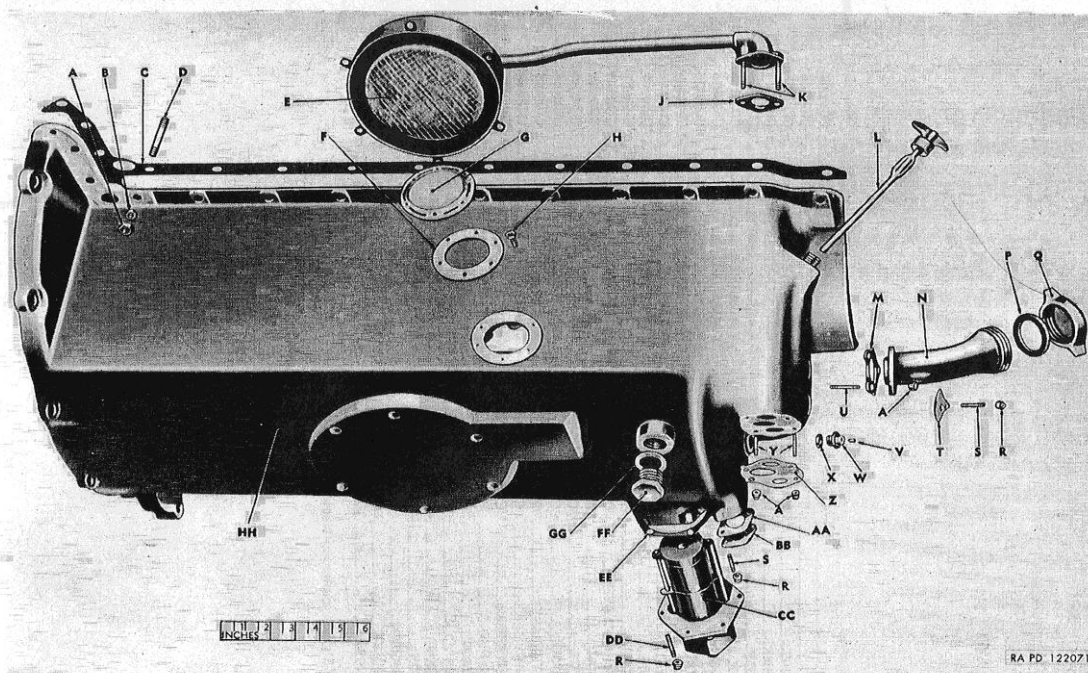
Engine oil pan and related parts, early type, exploded view.
